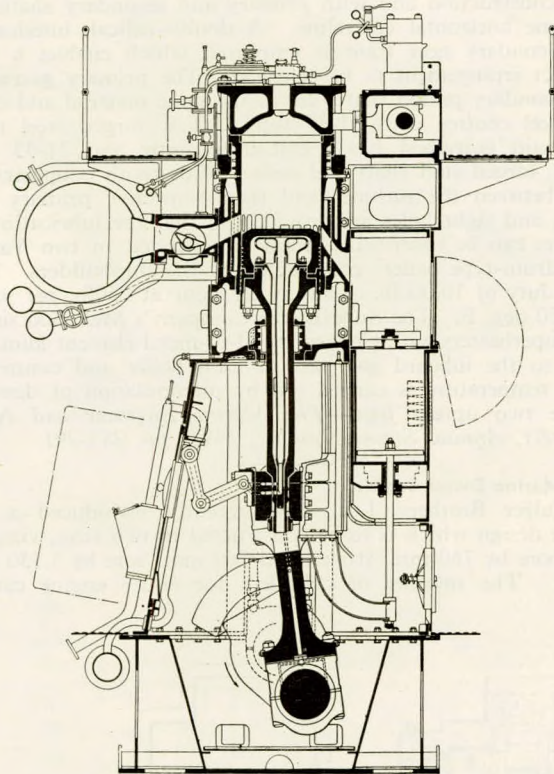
Sectional view of the Sulzer engine for the motorship Middlesex
